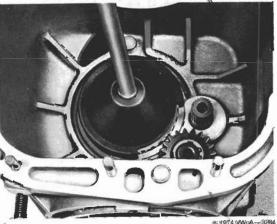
Special tool VW 381/14 being used to remove. the retaining ring for late-type pinion bearing
